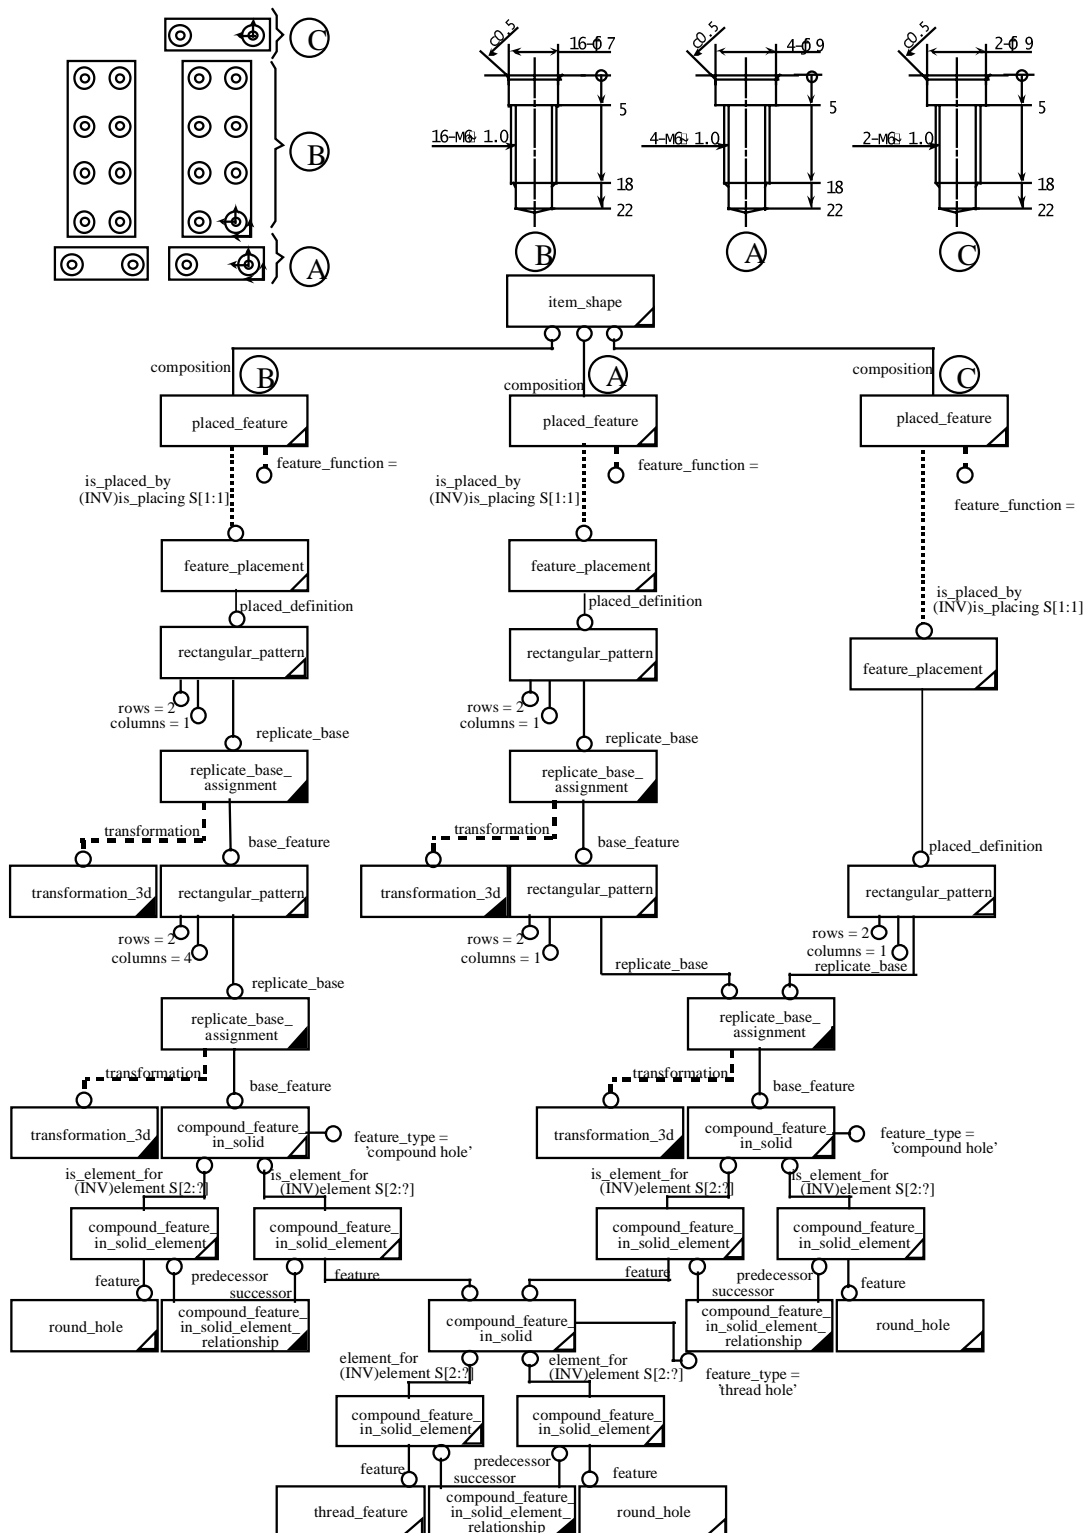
Location, cross section and instance of cam bearing cap installation screw hole
